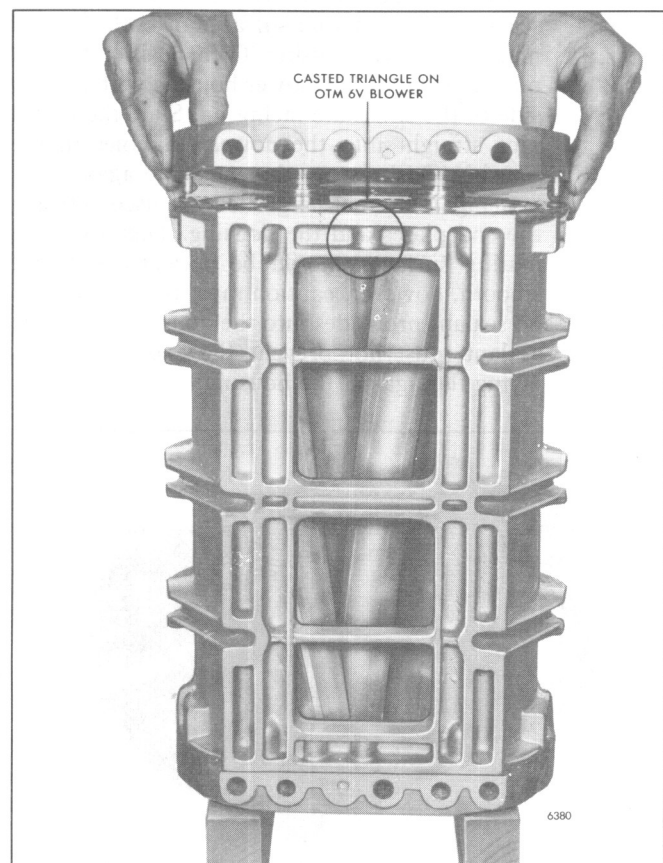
Installing Rear End Plate on Blower Rotors and Housing
